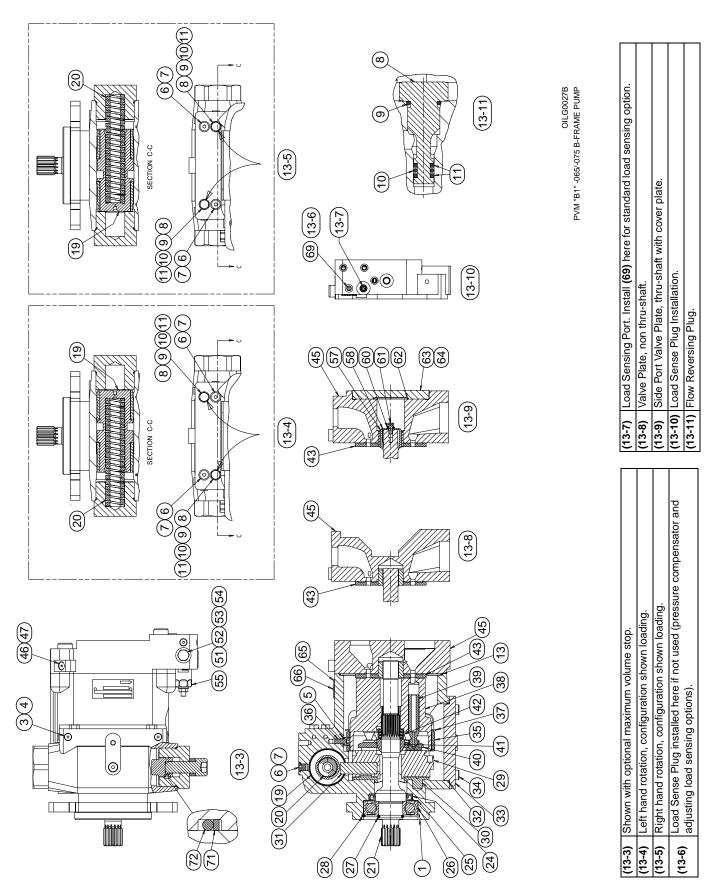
B. Exploded Parts Drawing for PVM-065/-075 B-Frame (519272-202 sheet 2)
